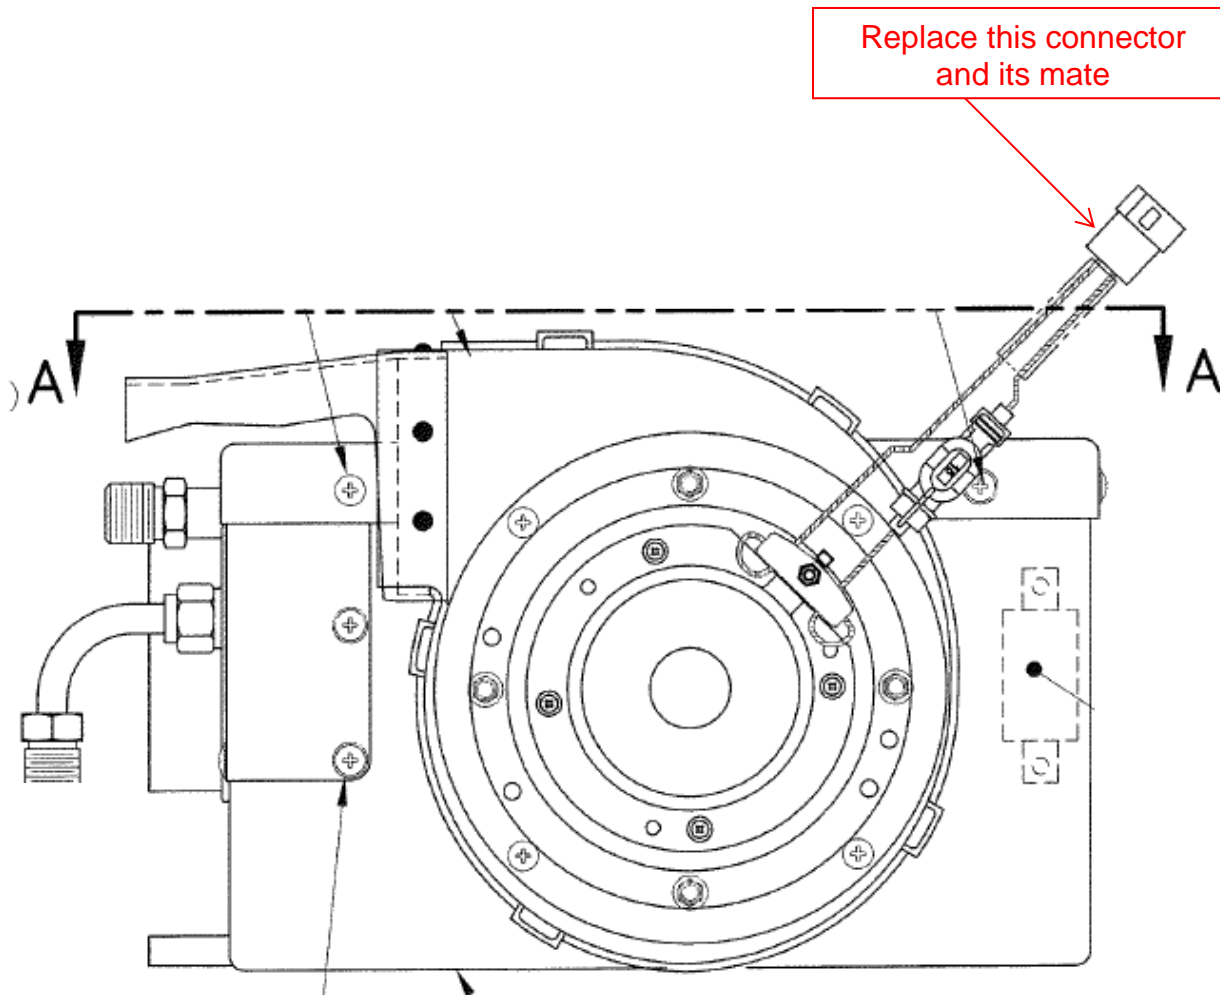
Aft Evaporator Blower Assembly (blower configuration may differ slightly. Connector is used on all 427 aft evaporators)
